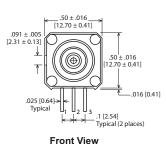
SHA: Dual Potentiometer or RS, Solder Hooks, 3/8" Dia. Bushing
